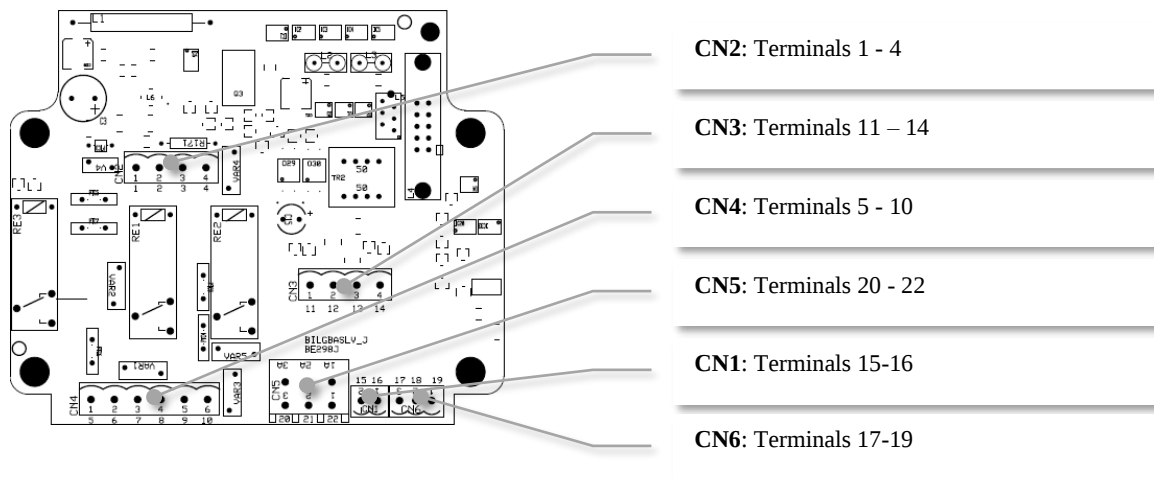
Base PCB of 24 V AC/DC MASTER unit.
